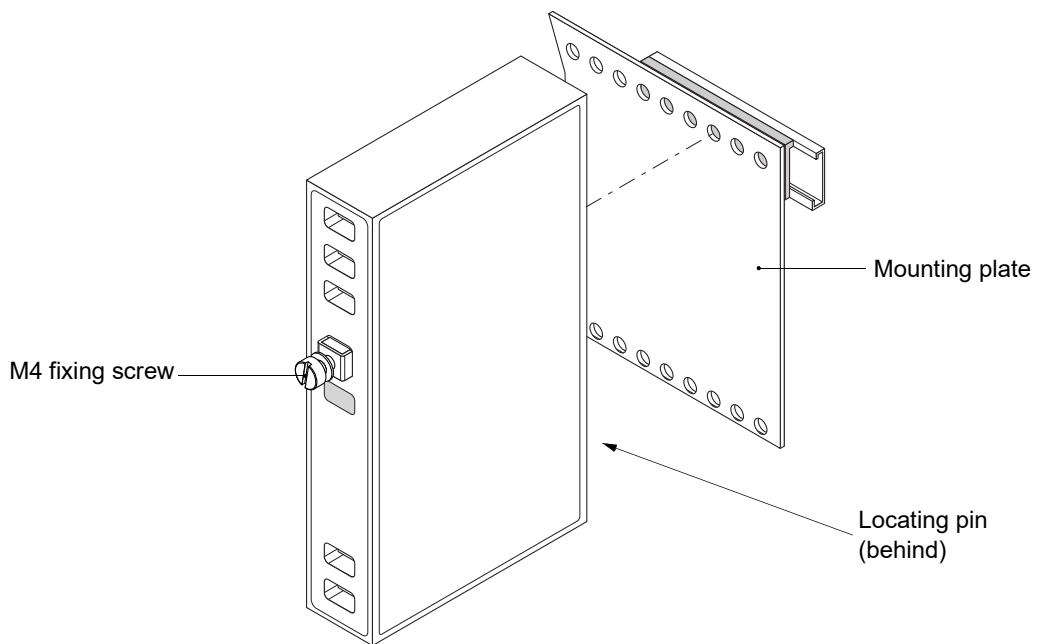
The mounting plate used by GSI123 galvanic separation units
